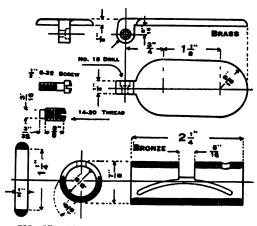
DETAILS OF THE MOTOR BEARINGS
